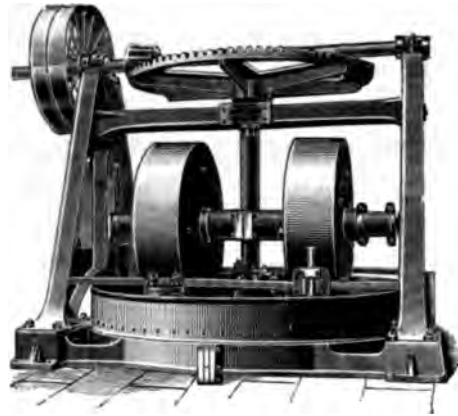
Crushing Mill with Movable Pan (Johnson).
